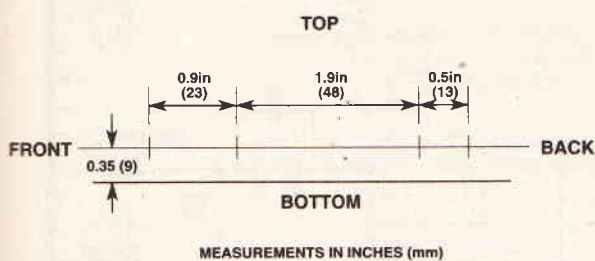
Position of drill holes in the heat sink, in millimetres. Holes are 5mm (or near) in diameter.
